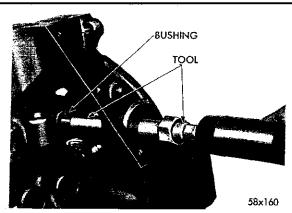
Installing the Distributor Drive Shaft Bushing Using Tool C-3053
